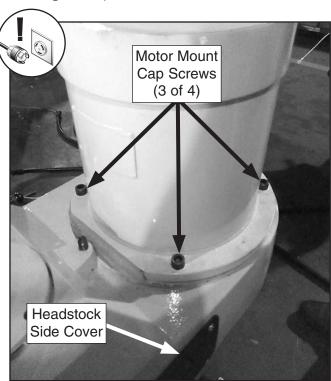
Location of G0797 motor mount cap screws and headstock side cover.
